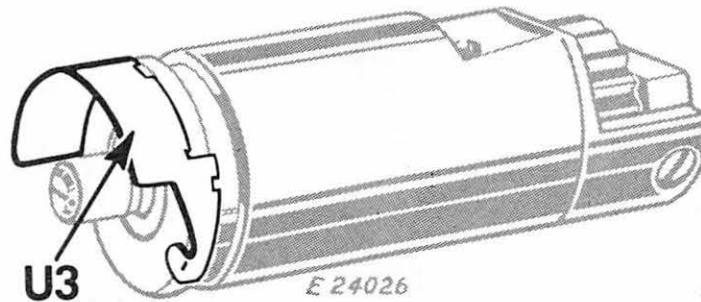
Oil Shield Attached to Hook Shaft Bushing
